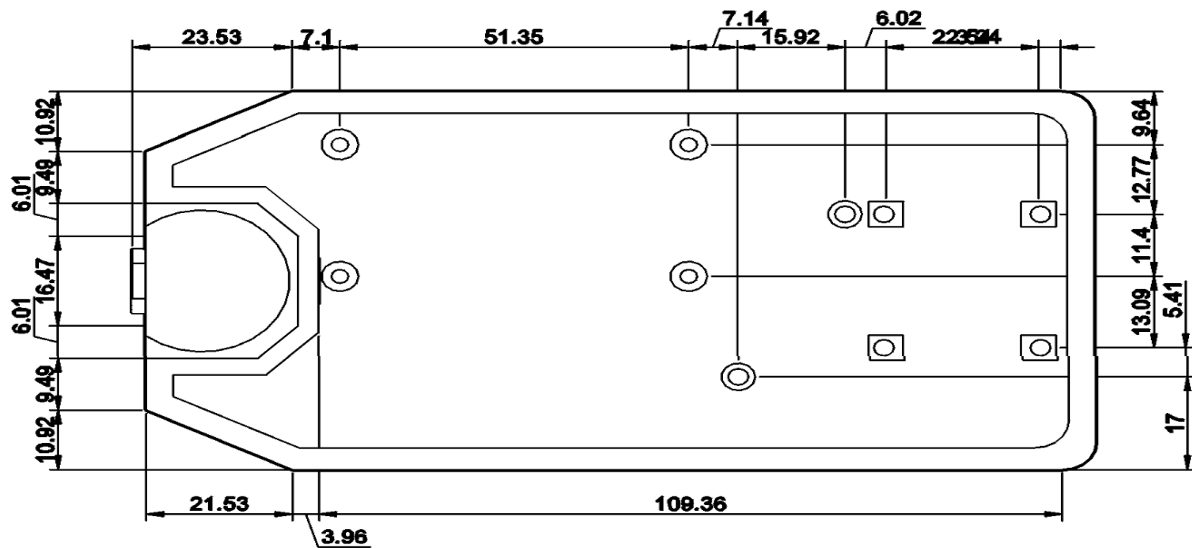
Dimensions for the Body of the Casing, Front View (mm).
